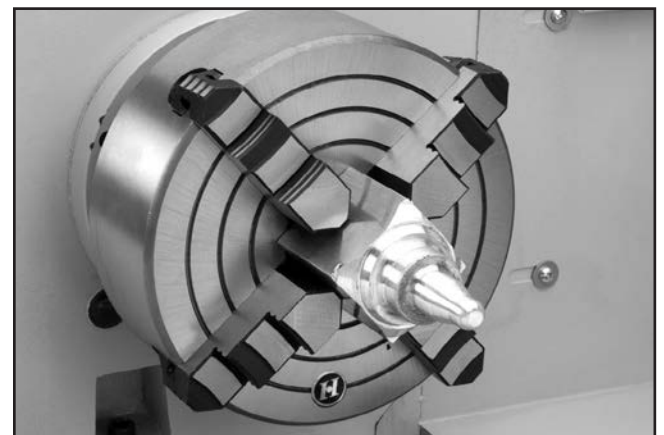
Generic picture of non-cylindrical workpiece correctly mounted on the 4-jaw chuck.
